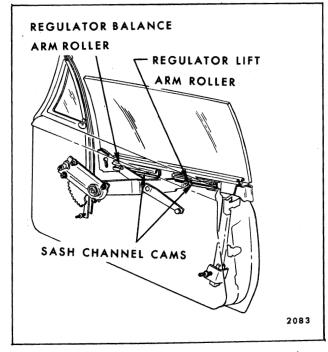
Front Door Window Installation - Buick, Oldsmobile, Pontiac "A-17 and 67" Styles
